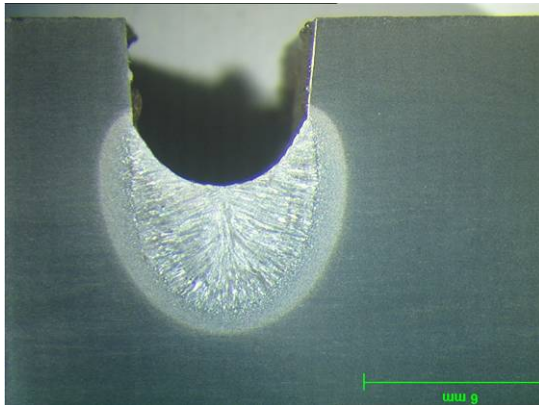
Welding Parameter Trials / Angular Position
